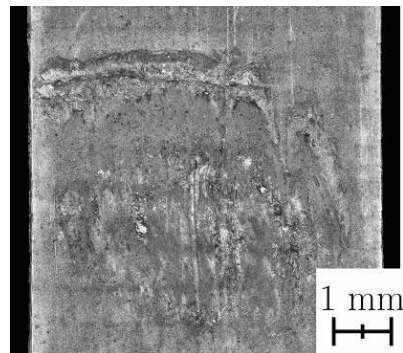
Detail of worn contact surface of the specimen after fretting test no. 1 – side B.
